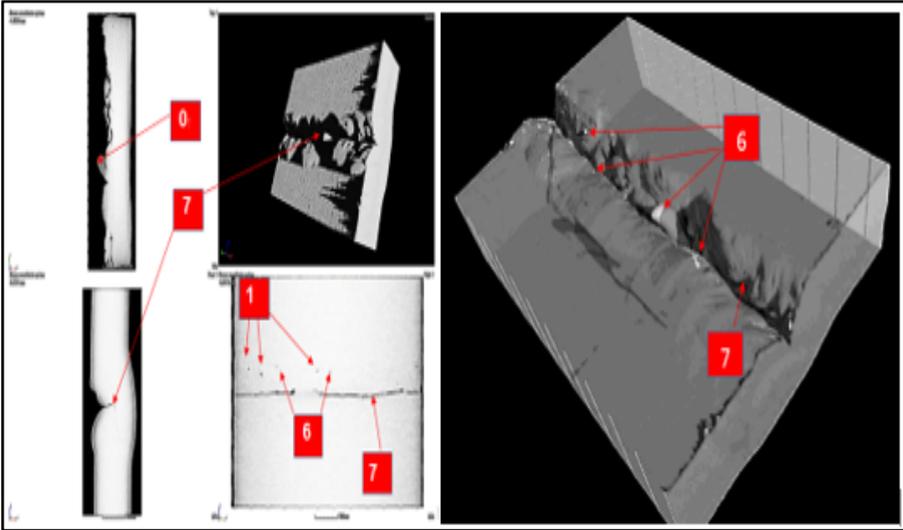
SPI weld sample no. 1 tomograph (0-weld root excess bead; 1-gas spherical pores; 6-solid intrusions; 7-no penetration) [1]
